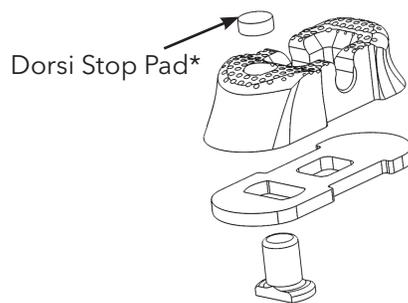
B: Seattle Kinetic Edge - Dorsi stop inserted into pad spacer, bumper and dorsi stop pad
